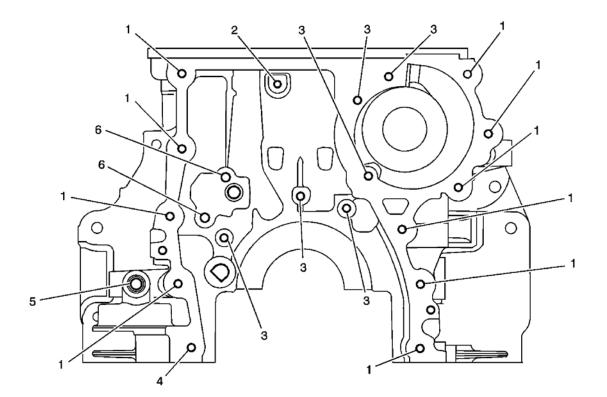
Engine Block Thread Repair - Front View Courtesy of GENERAL MOTORS CORP.
